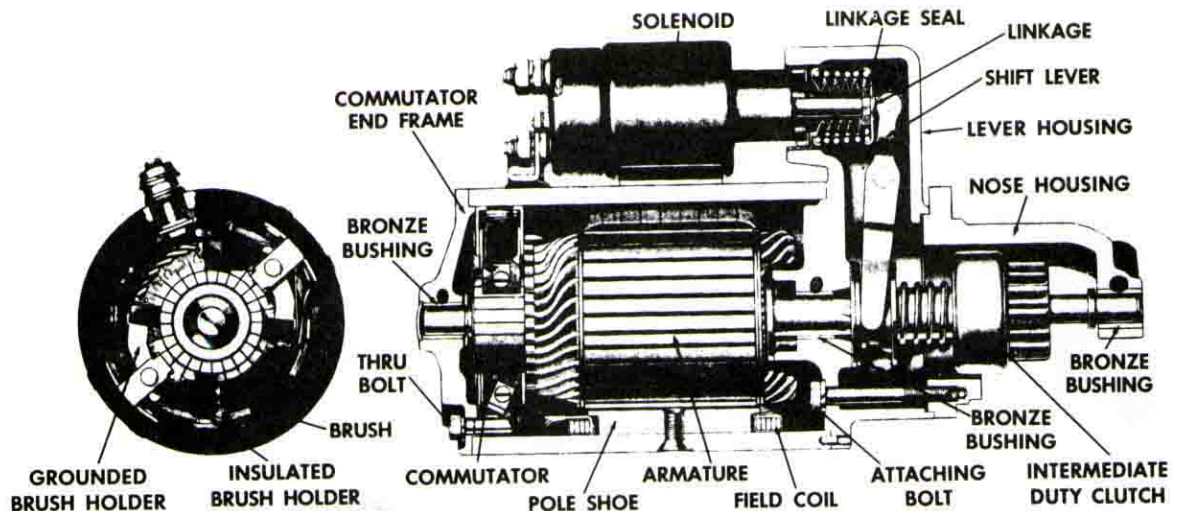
Cross-sectional view of motor with intermediate duty clutch.
